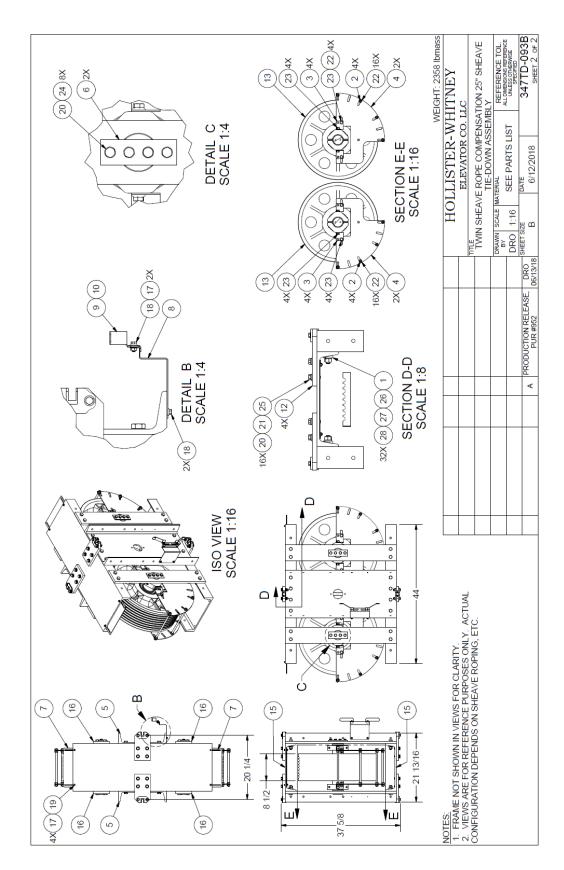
Model #347 Twin Ø25" Sheave Sheet-1
